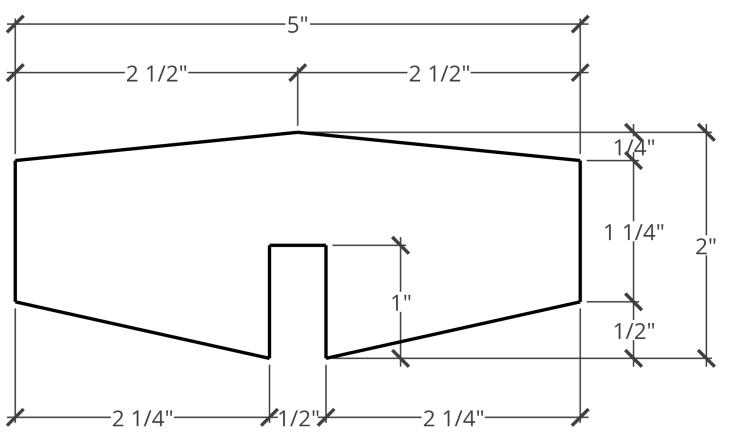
DETAIL DRAWINGS: HORIZONTAL STABILIZER
